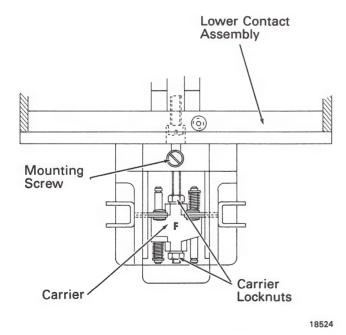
Bottom-Mounted Coil, Interlock Assembly
